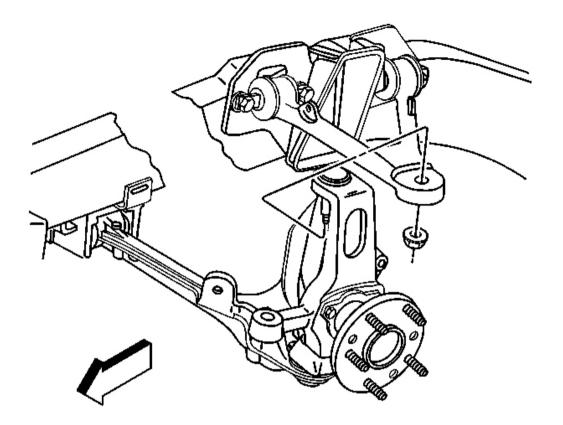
Upper Ball Joint Stud & Upper Control Arm Courtesy of GENERAL MOTORS CORP.
